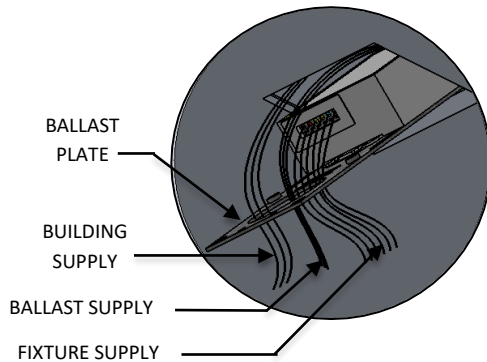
DETAIL SHOWING BUILDING SUPPLY AND DRIVER WIRE
